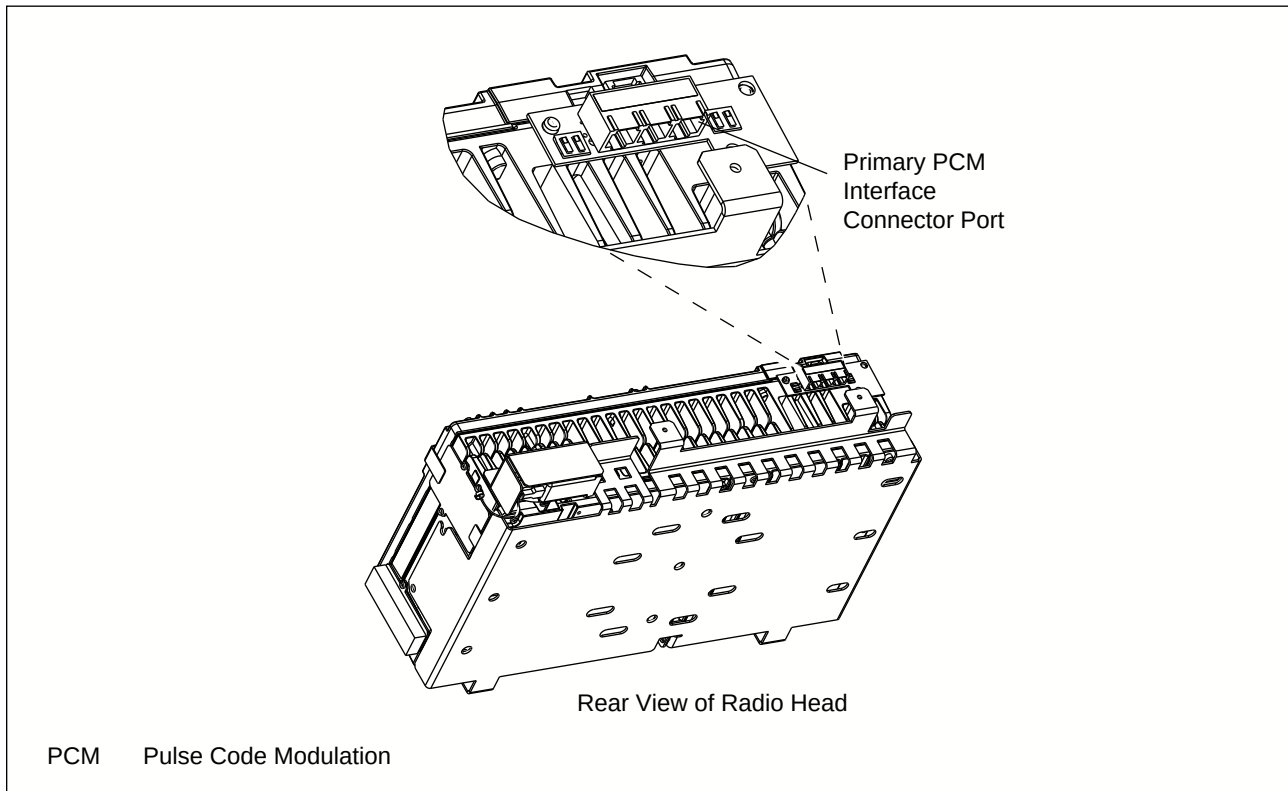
Primary PCM Interface Connector Location on Radio Head
